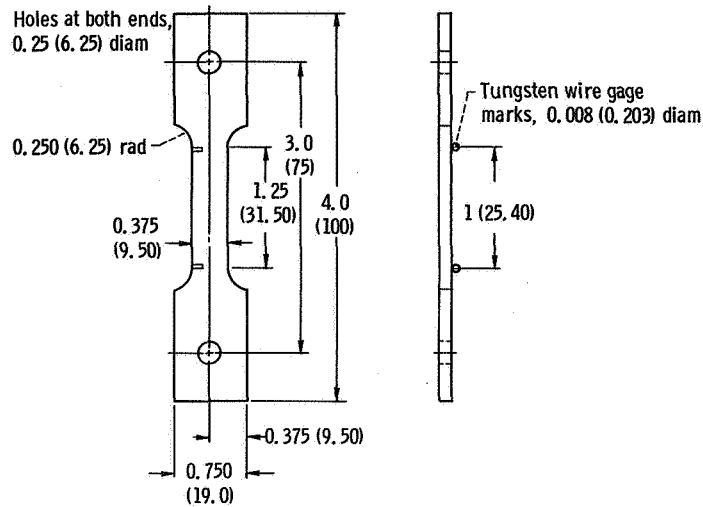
High-temperature creep-rupture sheet specimen. (Dimensions are in inches (MM)).
